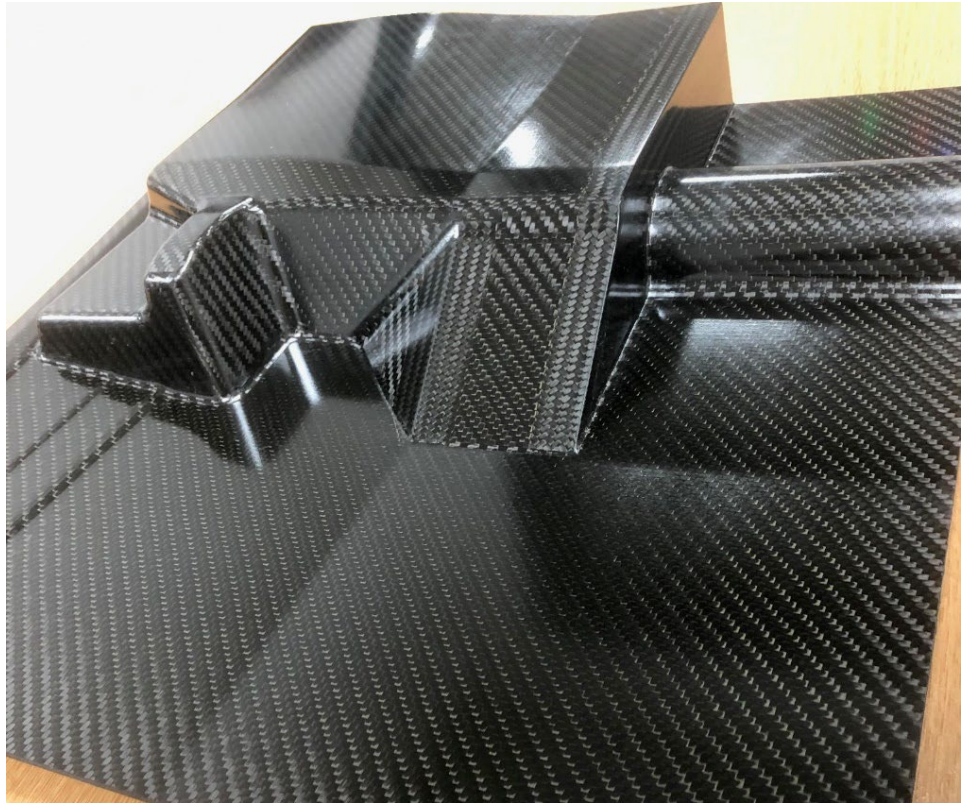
Complex tool with deep drafts, compensating angles and small radii.
